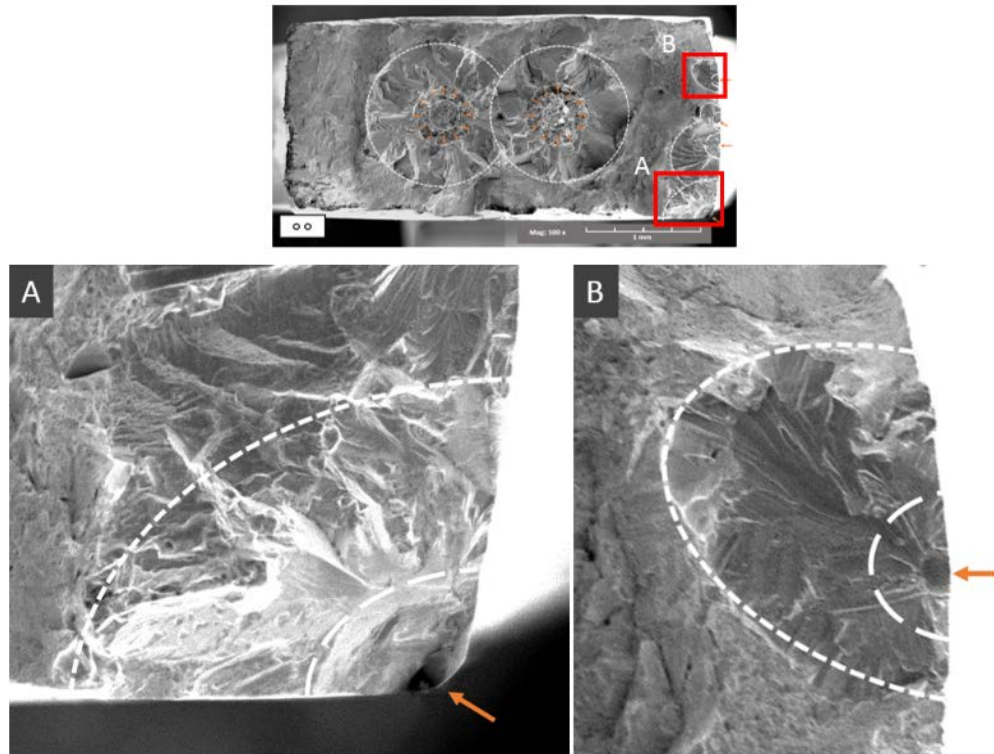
Surface defects/stress concentrators that initiated the cracking from the side seen in Figure 33.
